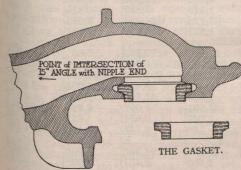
M.C.B. Standard Air Brake Hose Gasket.
